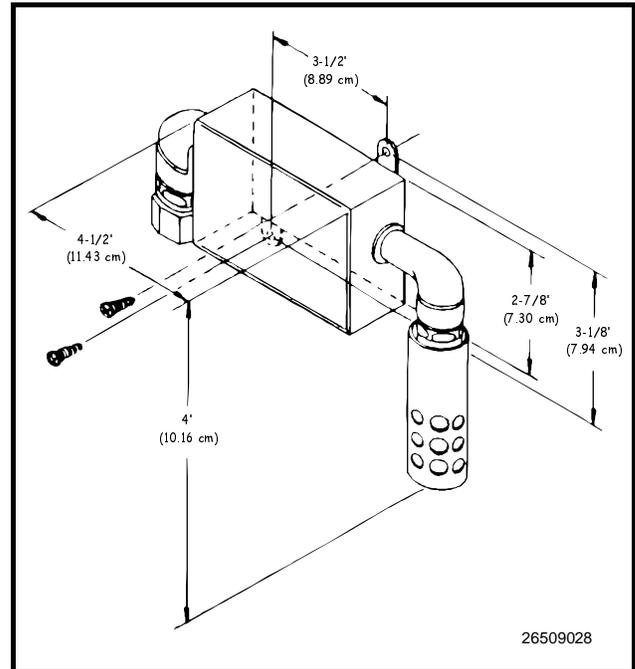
Outdoor RH Sensor Mounting Dimensions
